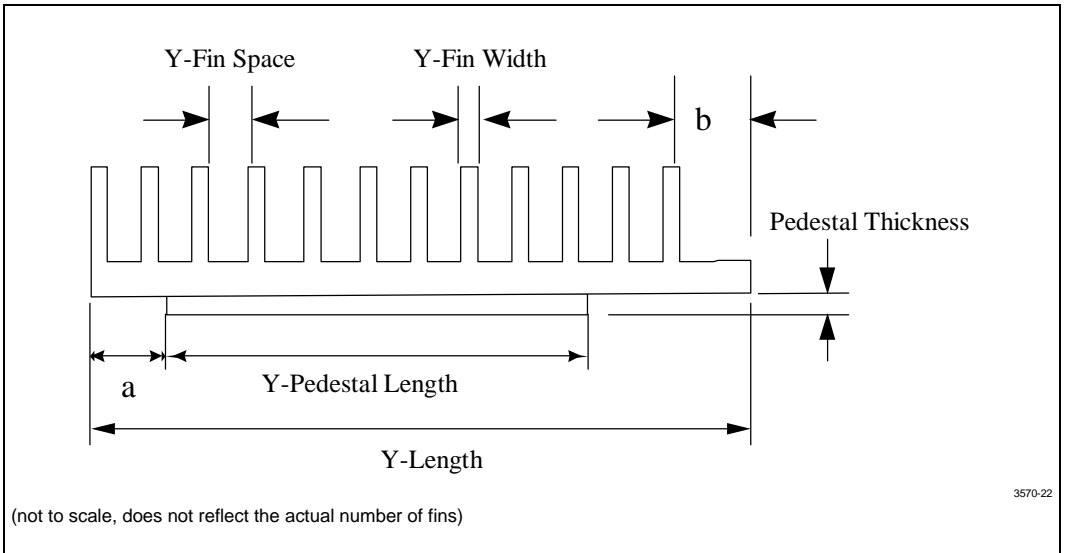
Typical Heat Sink Dimensions (View from Side-Y)
